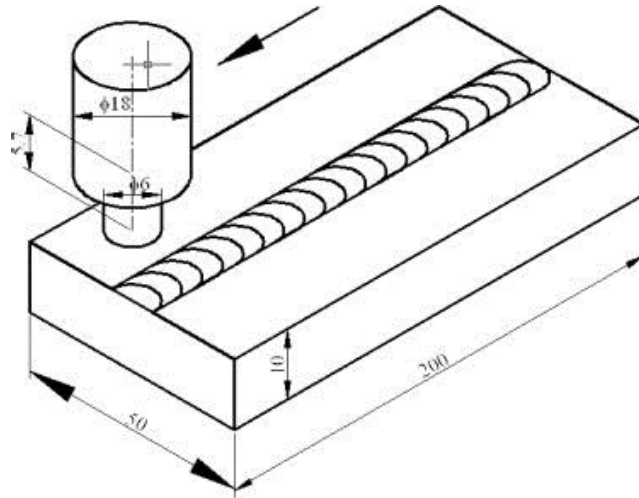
Friction stir processing set-up and cylindrical threaded profile tool [105].
